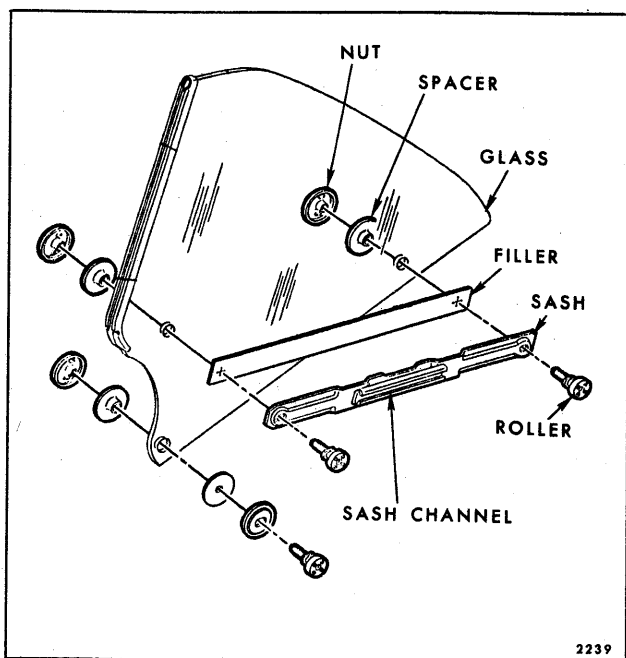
Rear Quarter Window Assembly - "X"-37 Style
